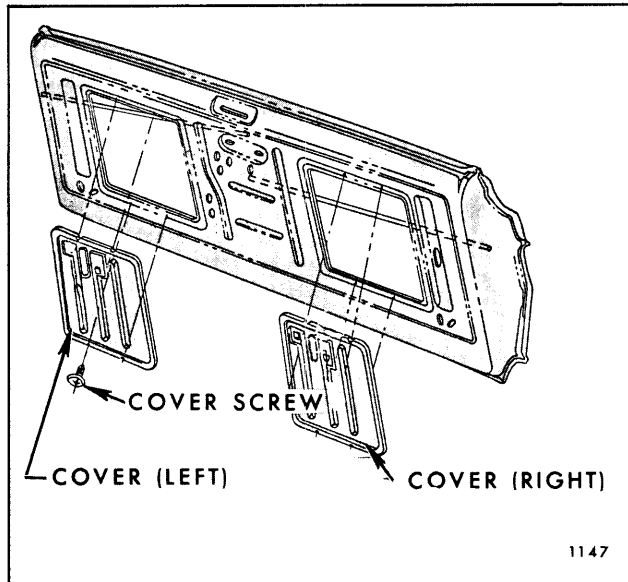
Tail Gate Inner Panel Access Hole Cover
